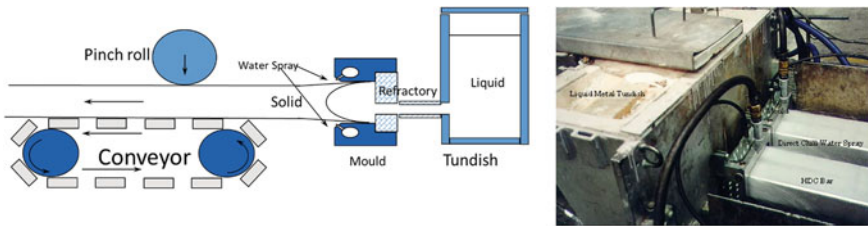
Overall schematic (left) and small horizontal DC casting machine (right)
